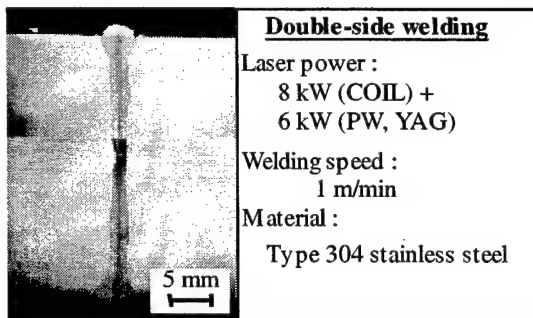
Welding results in type 304 stainless steel butt joints of plates thickness 30 mm
